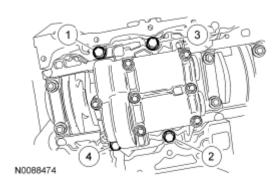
Identifying Balancer Unit Bolts Tightening Sequence
